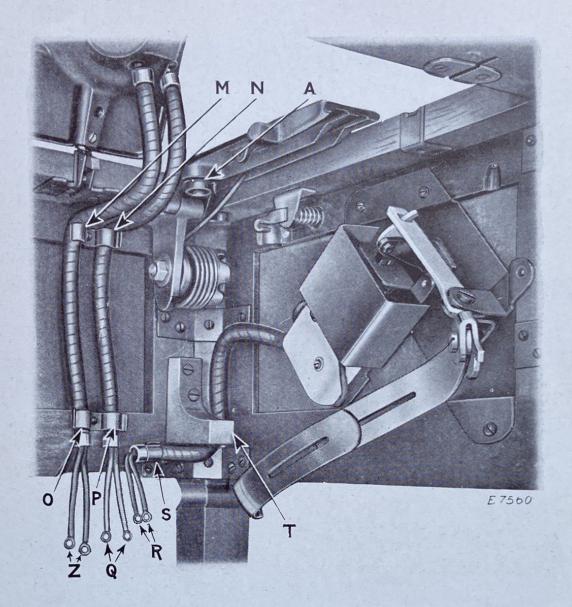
Arrangement of Wiring of Machine 101-3 on Cabinets 40 and 306
